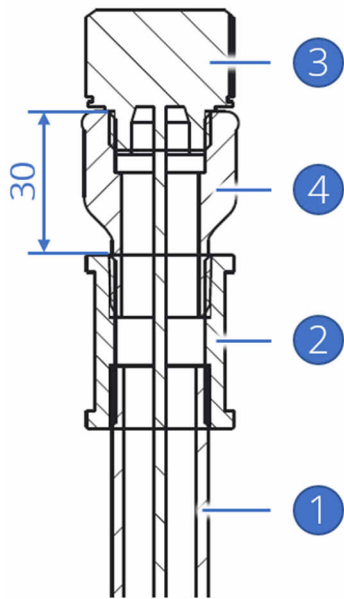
mechanical oil dipstick – installation angle 28,3°
